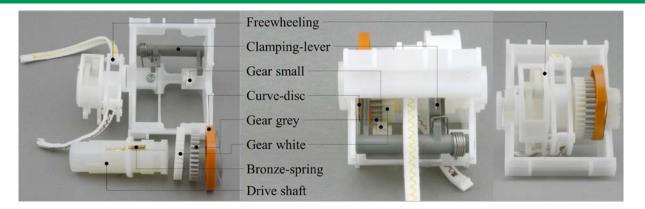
Components of the sun-blind turning unit with one disassembled unit (left) and one assembled unit (right)
